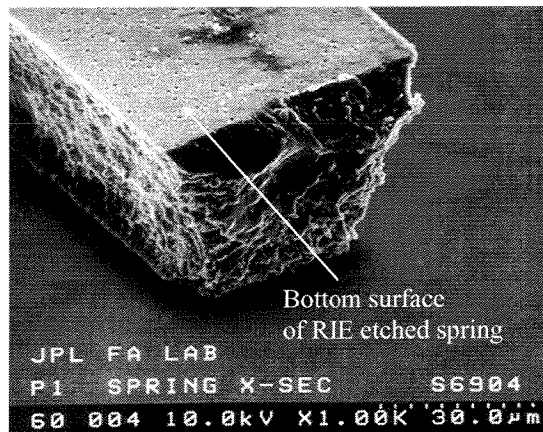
Enlarged view, showing damaged bottom surface of RIE etched spring.
